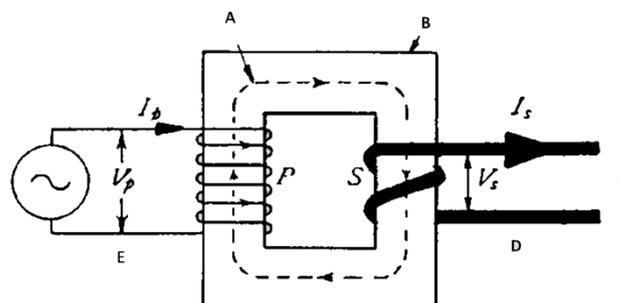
Welding transformer. A. Magnetic Flux, B. Transformer core, C. Welding machine, D. Secondary Circuit, E. Primary circuit. V_p – primary mains voltage, I_p – primary current. V_s – secondary welding voltage, I_s – welding current.
